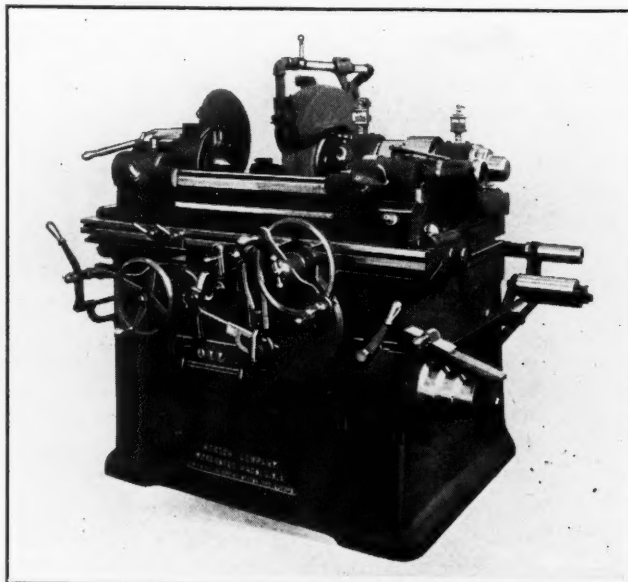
Norton 10- by 18-inch Plain Cylindrical Grinding Machine
